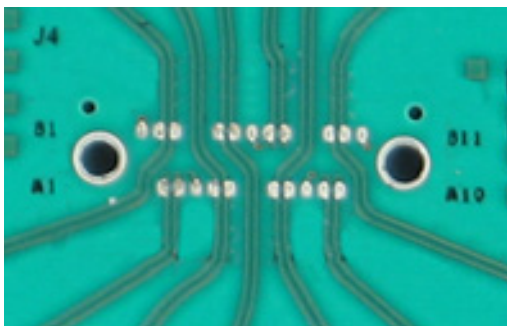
Half Size PCIe Gen 3 PCB Footprint
